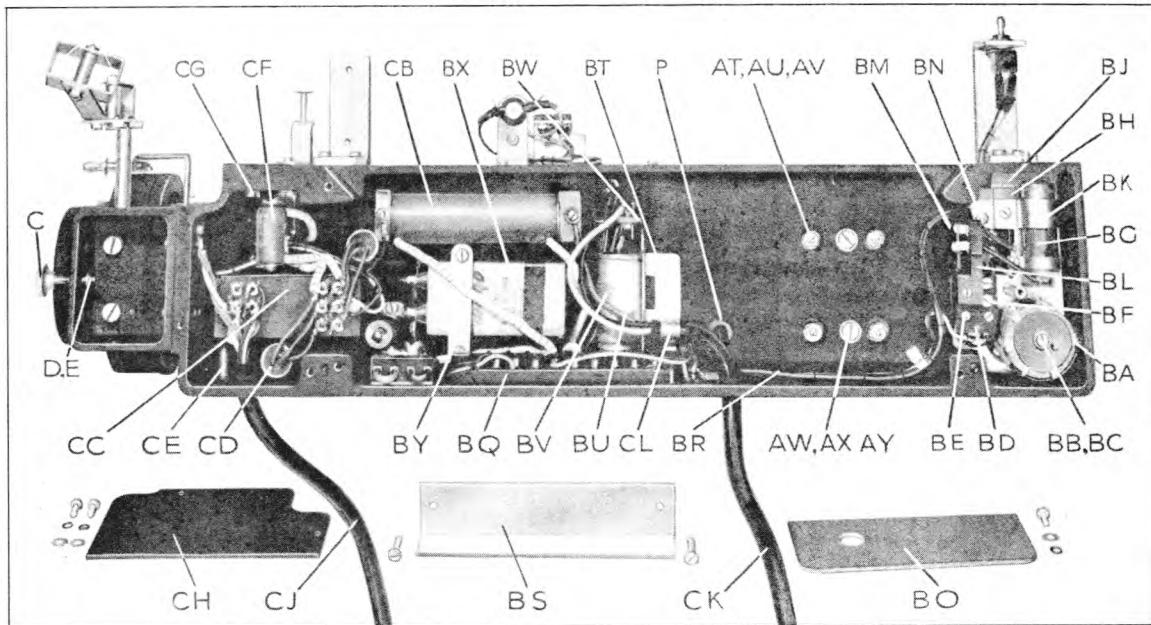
No. 67P MAIN BASE ASSEMBLY (UNDERSIDE VIEW)
